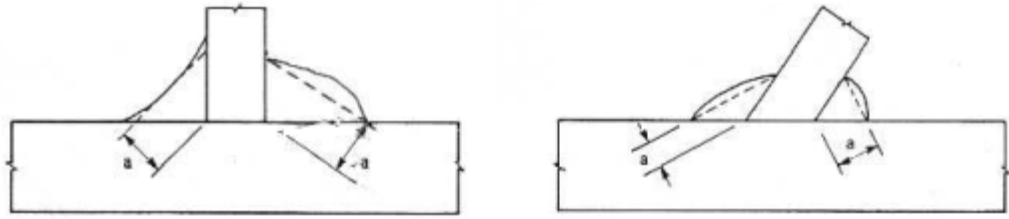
Throat thickness of a fillet weld. (SFS-EN 1993-1-8 2005)
